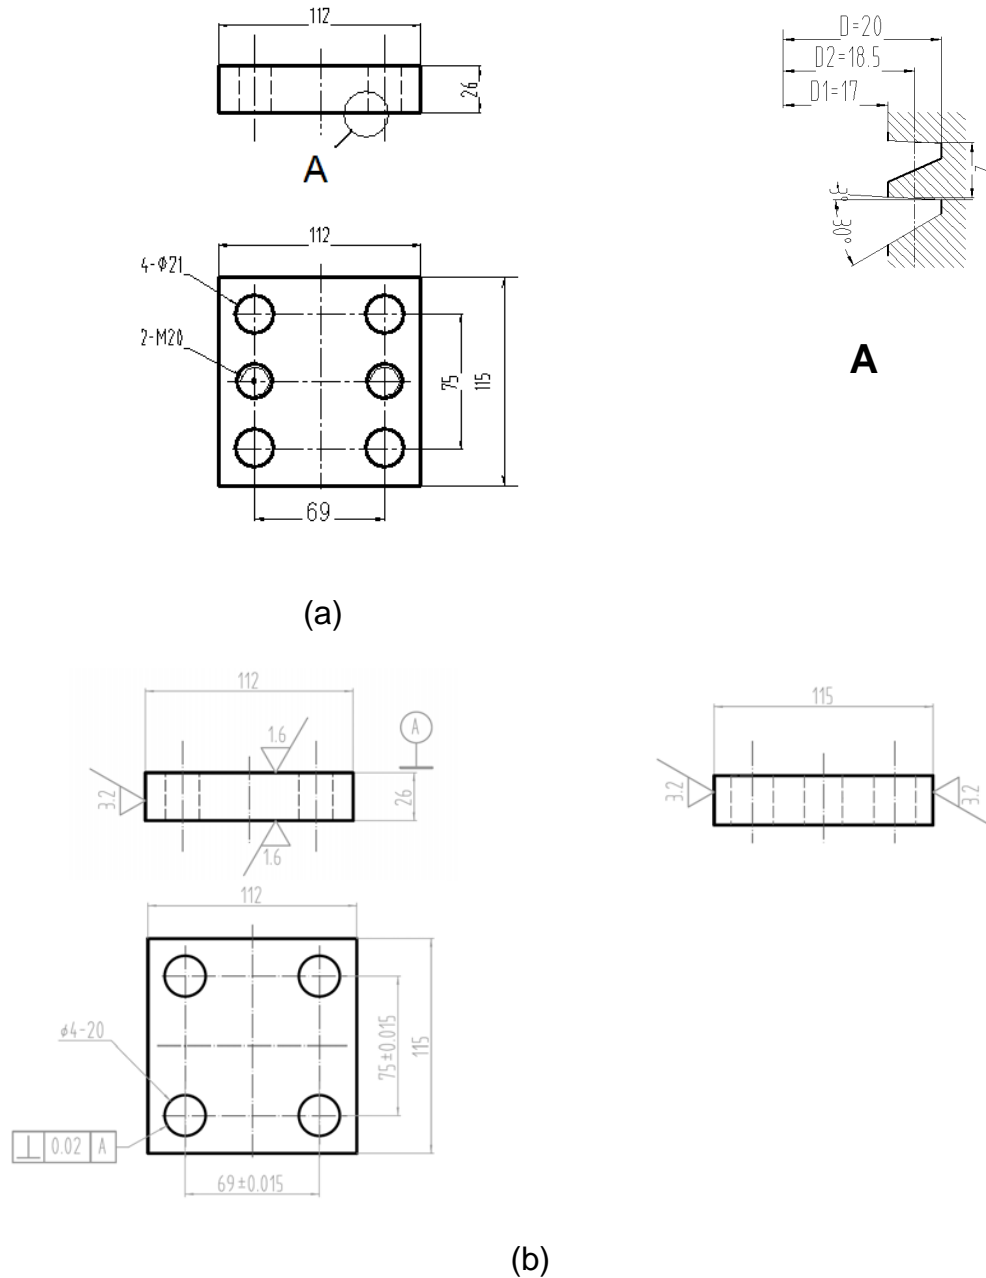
Covers. (a) top cover and (b) lower cover (all dimensions in mm)
